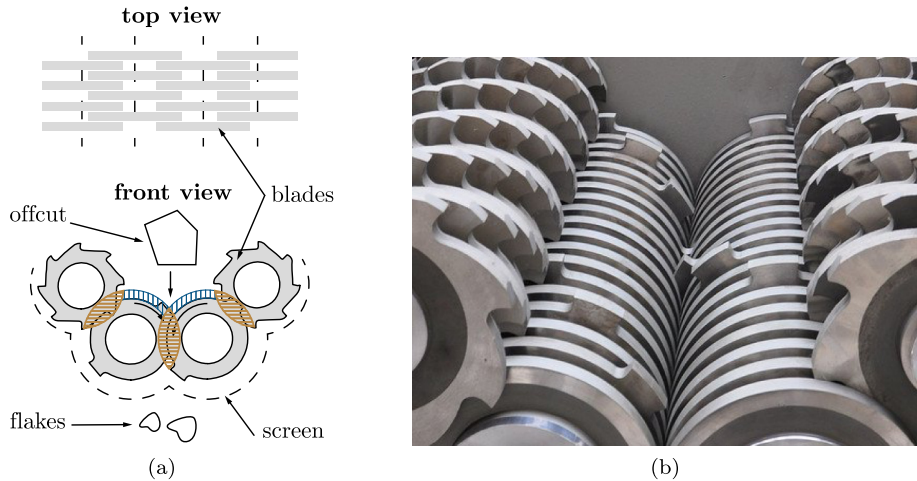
Schematics of a shredder, top and front views in 3a, and inside view of a four-shaft shredder (image courtesy of UNTHA) in 3b.
